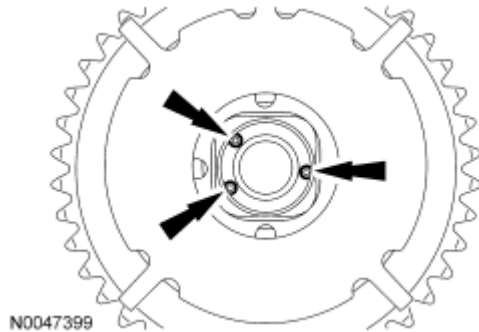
Inspecting Front Of Camshaft Phase And Sprocket For Missing Or Damaged Roll Pins
